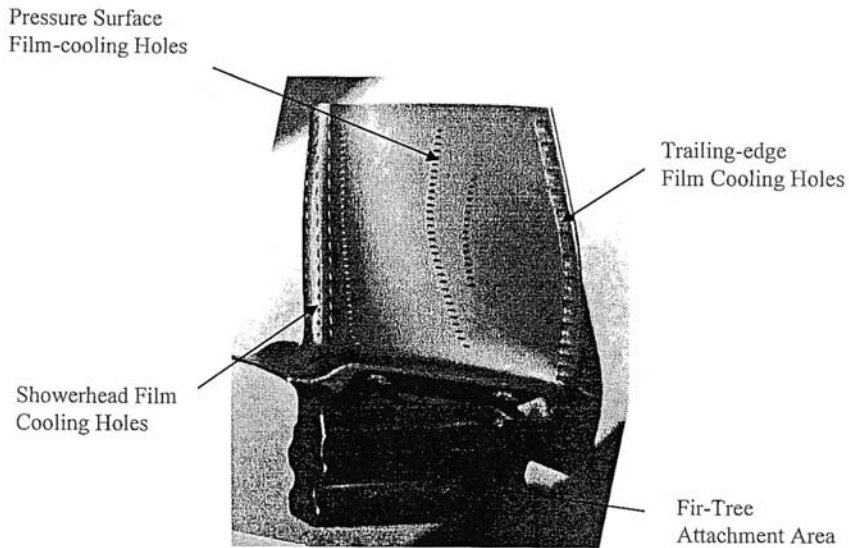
Typical high-pressure turbine blade with shower head and film-cooling holes.
